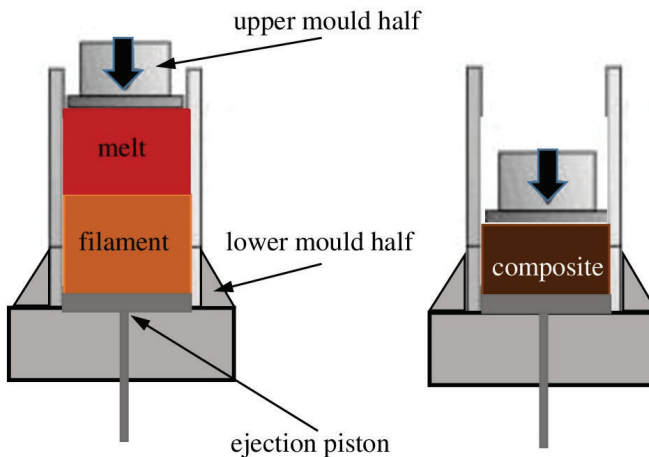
Squeeze casting (pressure die infiltration casting)
